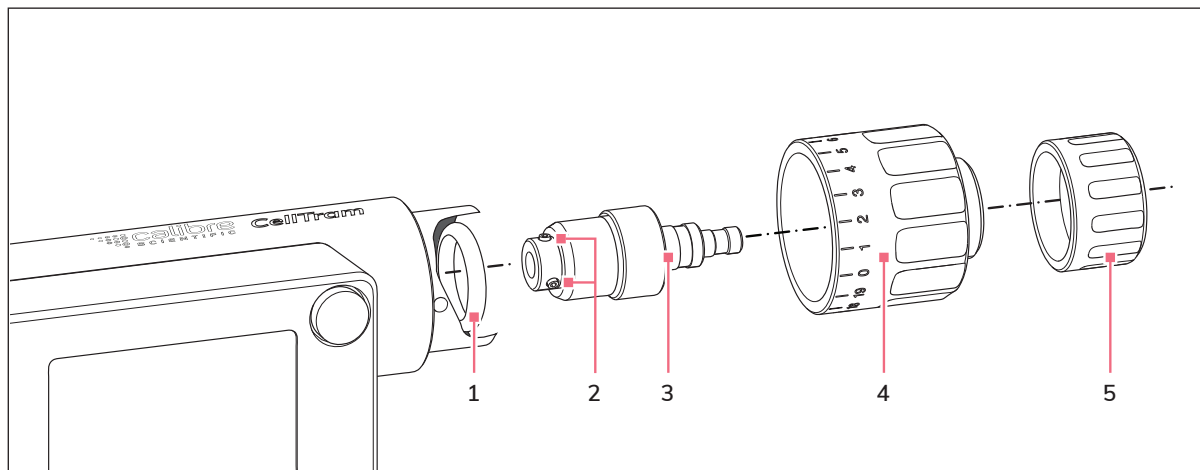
Gearings and adjustment knobs in CellTram 4
